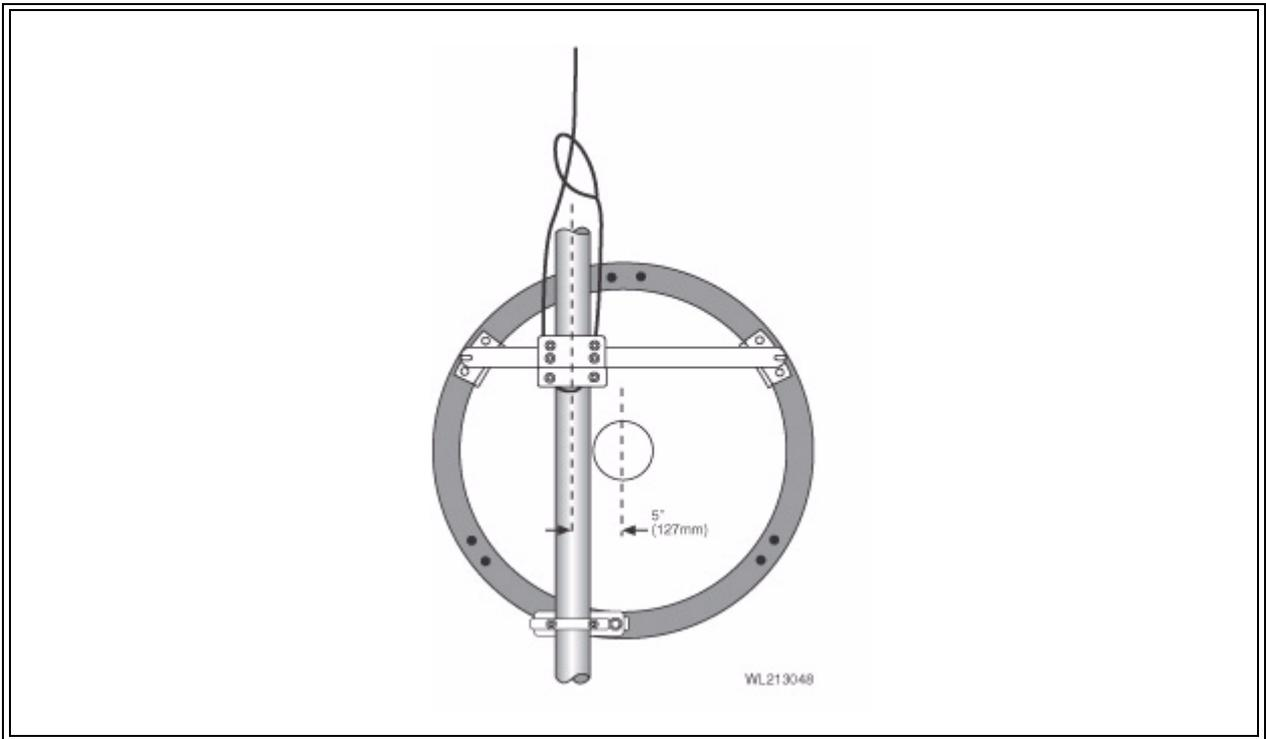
Azimuth Clamp/Shear Stop Assembly
